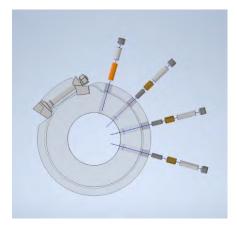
Setscrews, Spacers, Oil Cylinder, Shear Pins
